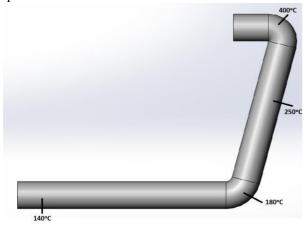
CAD Model of exhaust manifold of Bajaj Pulsar 150
